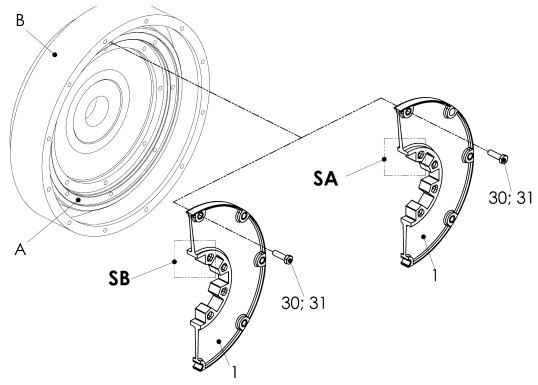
Mounting the elastic element (1; designs SA or SB)
